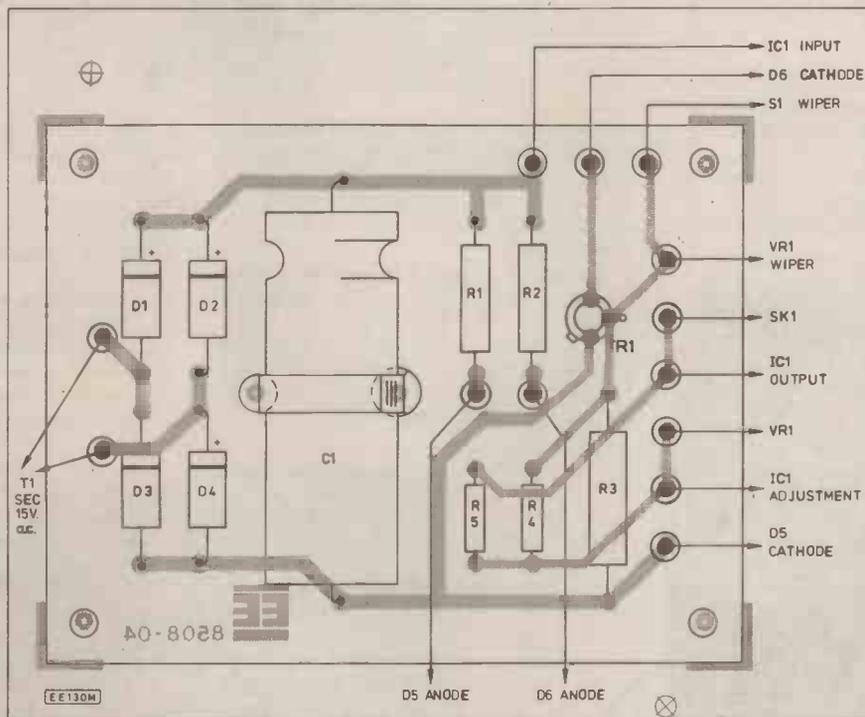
Component layout and interwiring details for the Drill Control Unit.
